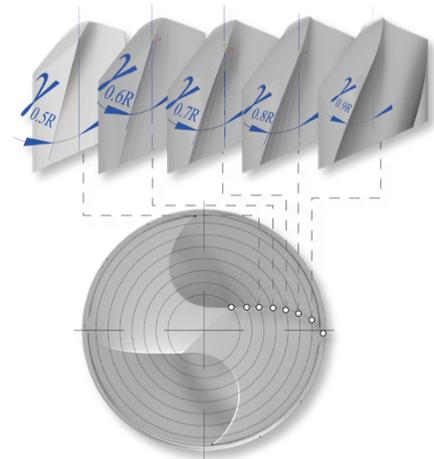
Defining the rake angle on a drill with the toroidal flank surface
